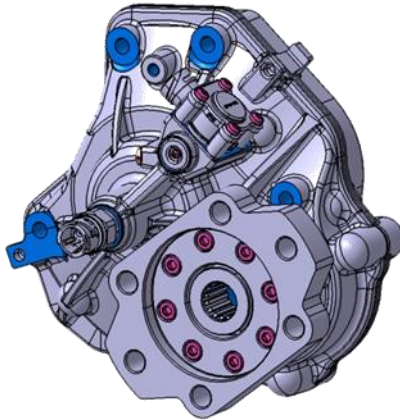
PTO drive assembly shown with SAE-B 2 or 4 bolt configuration.
